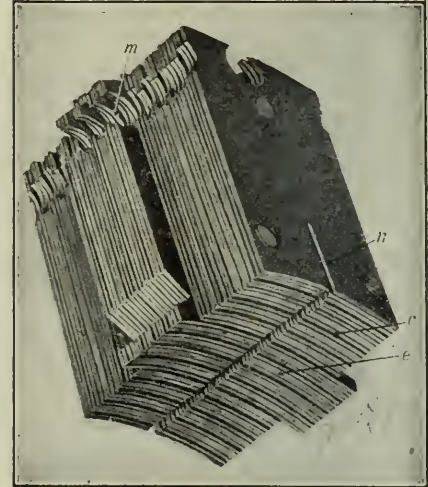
LAMINATED POLE PIECE BEFORE BEING CAST-WELDED INTO THE FRAME OF THE FORT WAYNE GENERATOR, FIG. 296
